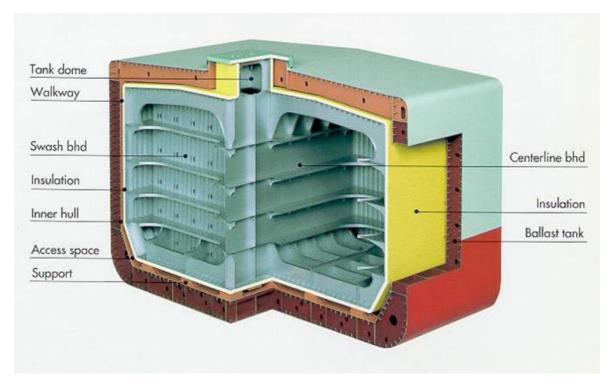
Prismatic Tank – Courtesy of IHI Marine United Inc.
